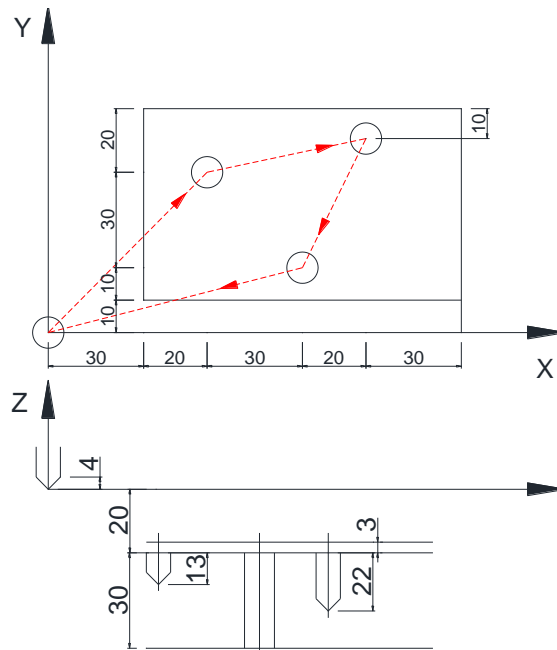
Sketch 1 of Workpiece Machining Process
